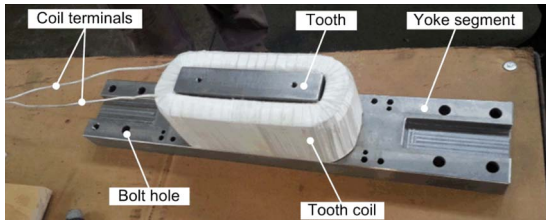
Detail of yoke segment and tooth assembly with relevant tooth coil.
